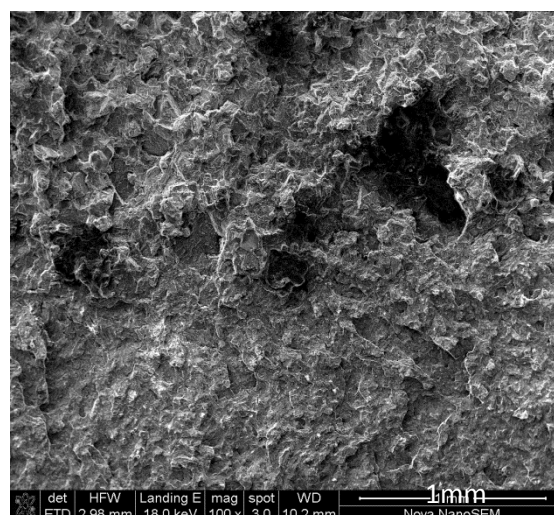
Fracture surface of 580°C temper specimen, showing difference between the fast fracture surface and the SCC surface; the absence of corrosion attack on the fast fracture surface can be noted
